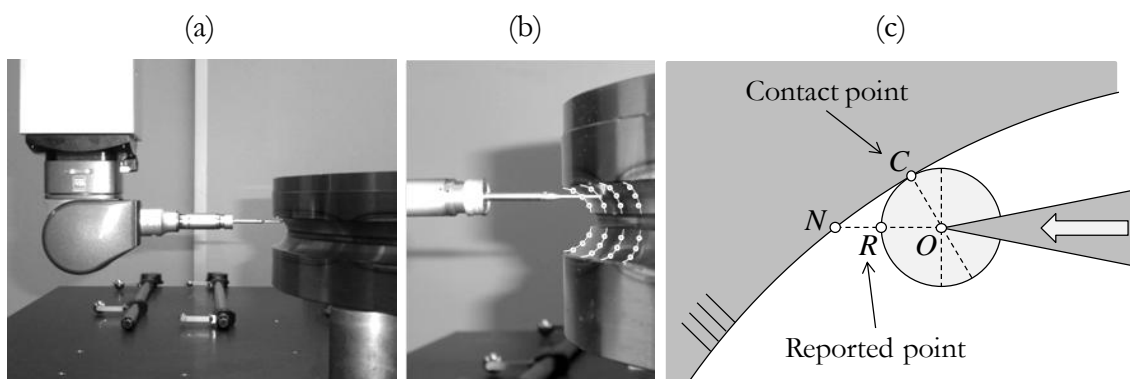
Coordinate-measuring machine and measured rings.
